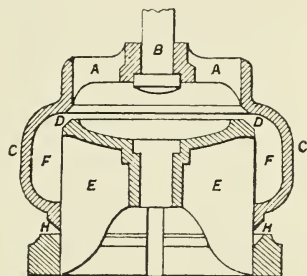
CORNISH PUMPING ENGINE. ENLARGED SKETCH SHOWING VERTICAL SECTION OF EQUILIBRIUM VALVE.
